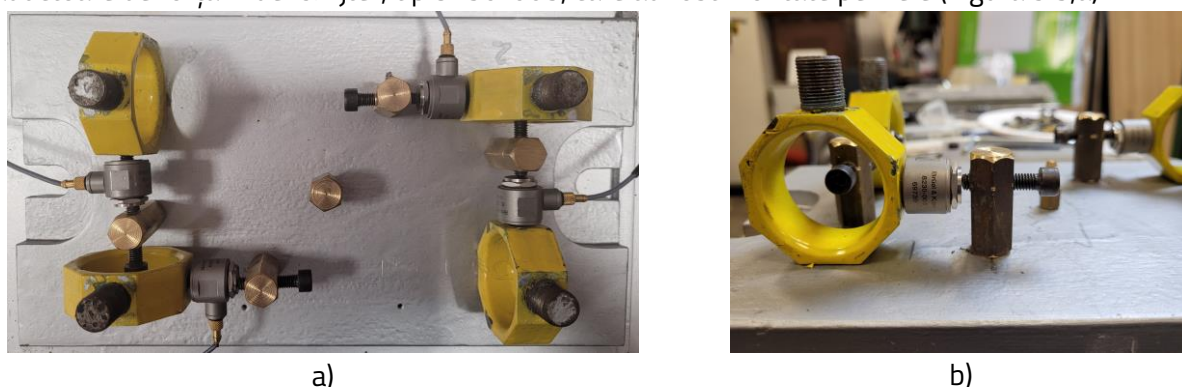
Forța Traductor de forță's mounting: a) in rings; b) detailed mounting
